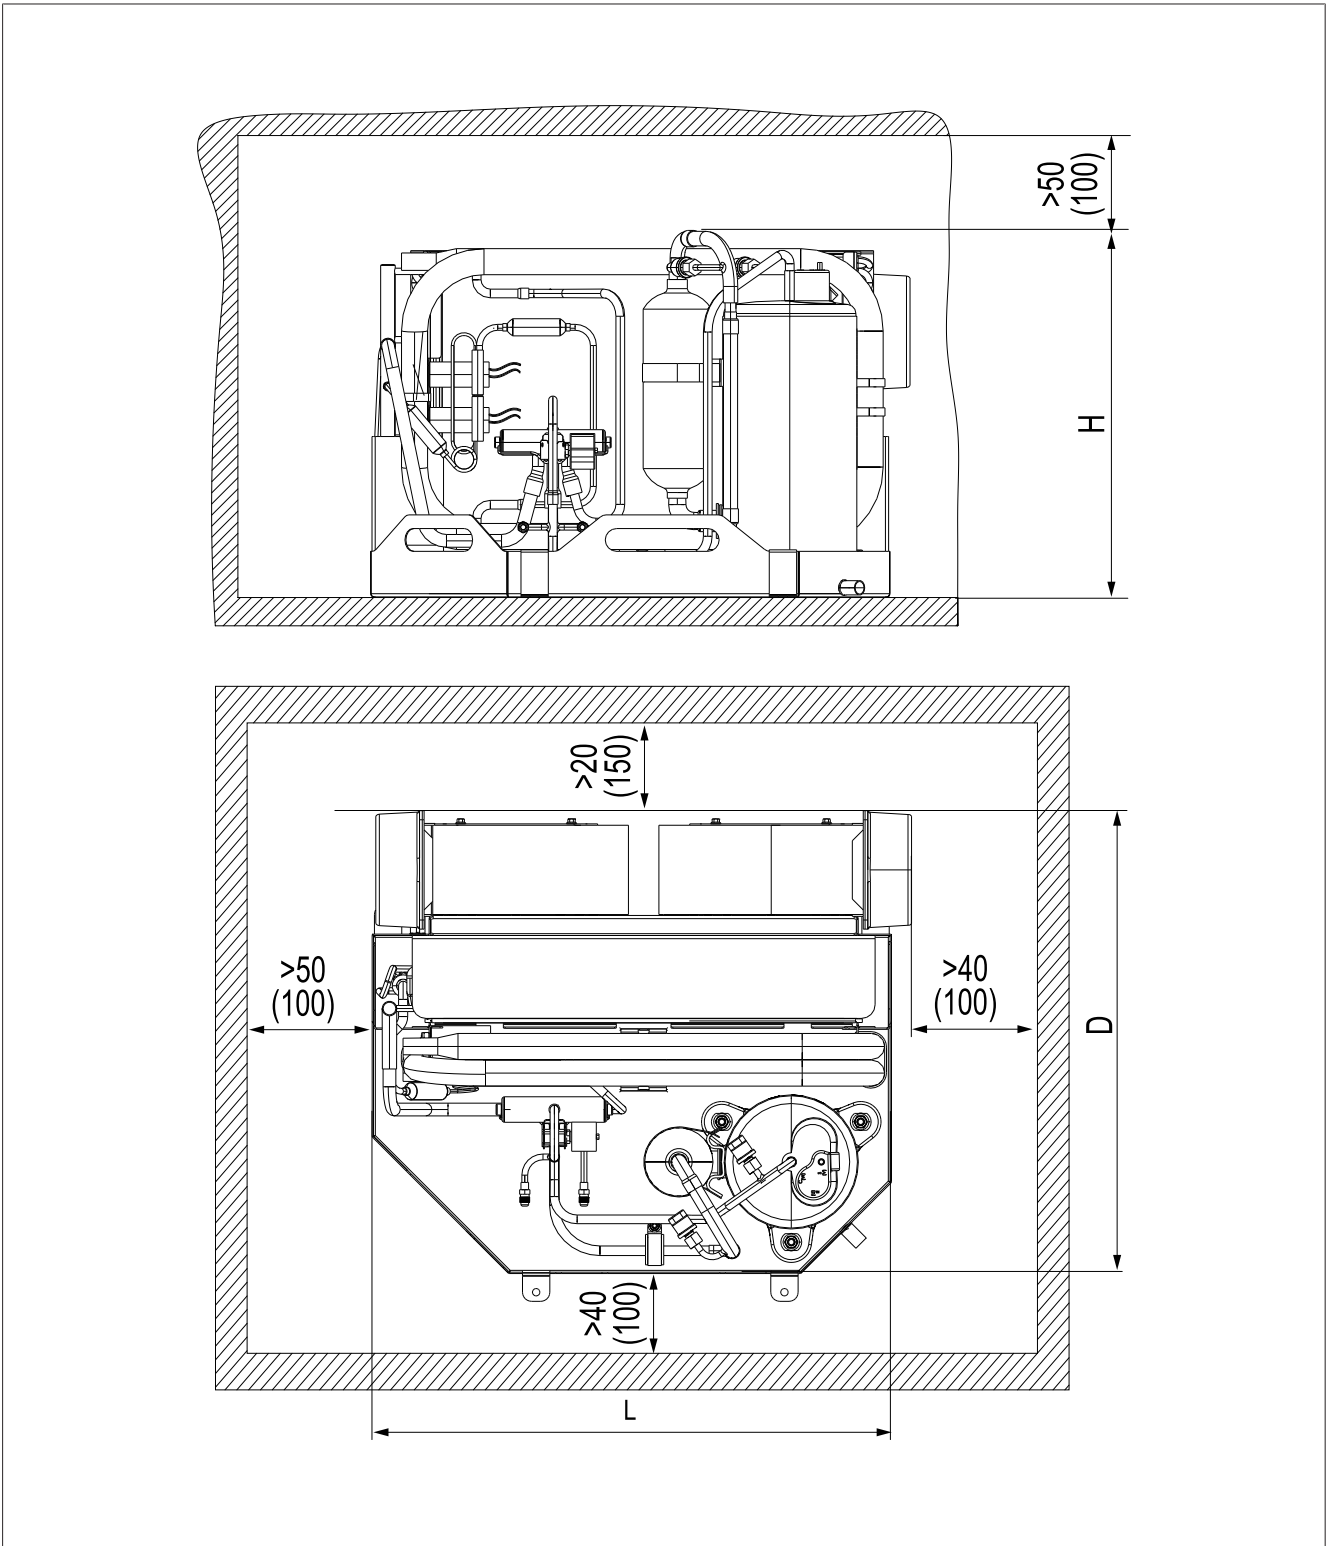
Dimensions and minimum distances Type 27K (mm)
